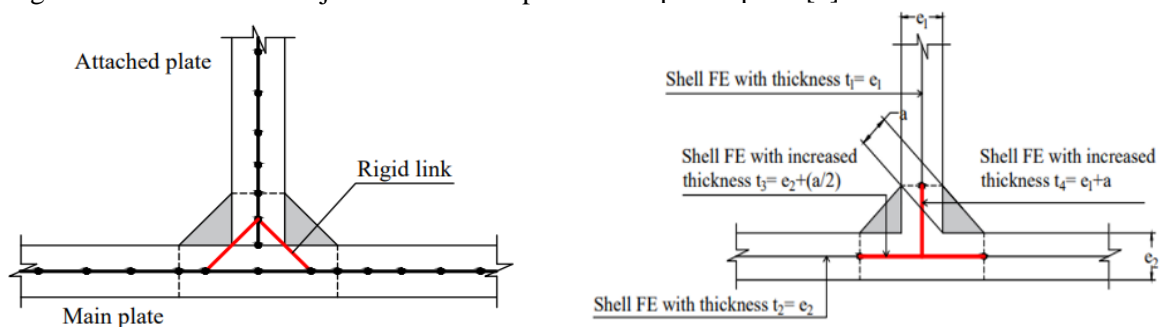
Fillet welds modelled in T-joints, (a) Rigid links [44], and (b) Increased thickness method.
